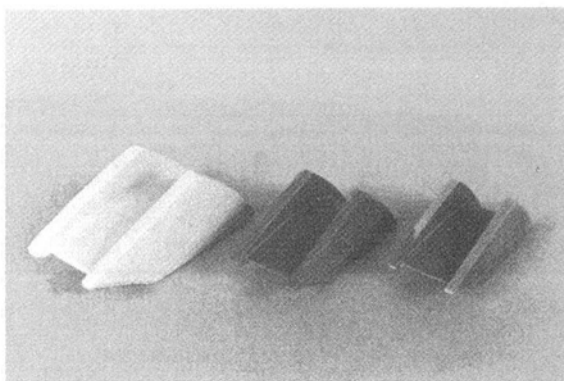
Molded sintered and machined nozzle (CGT 303)
